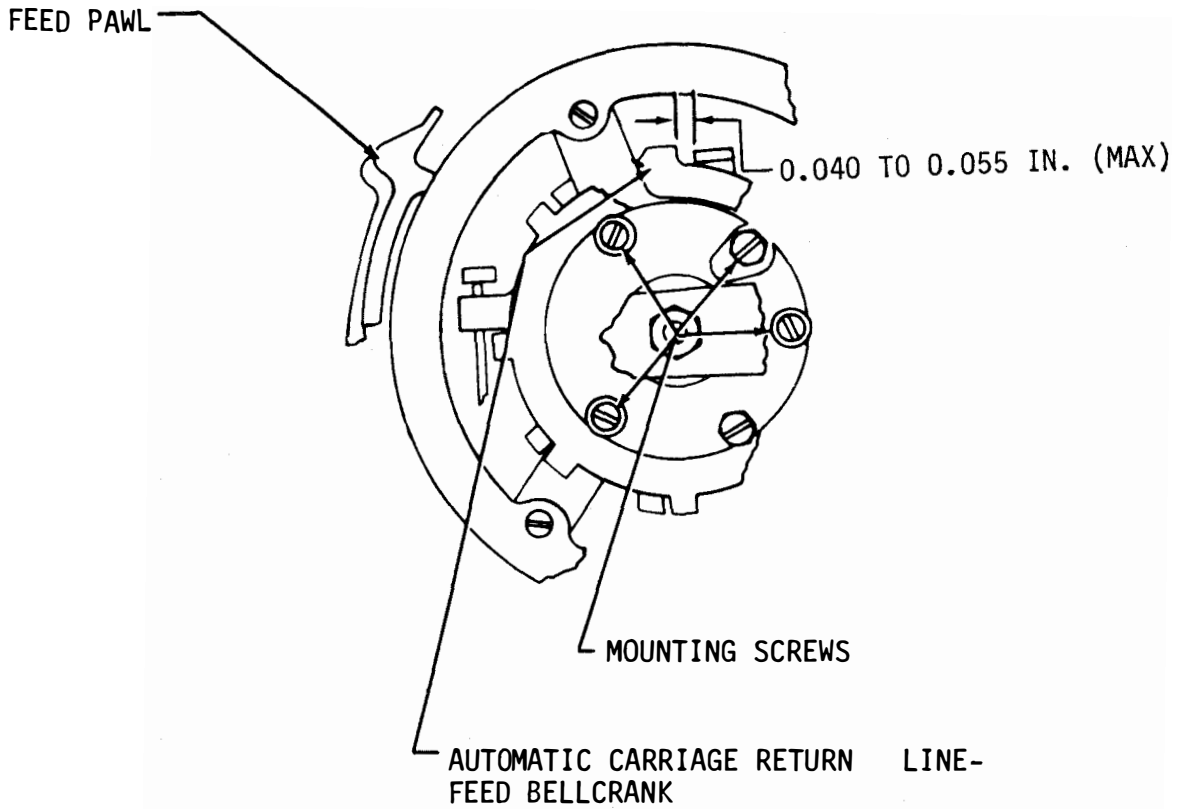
Right Margin with Automatic Carriage Return Line-Feed Ring, Front View
